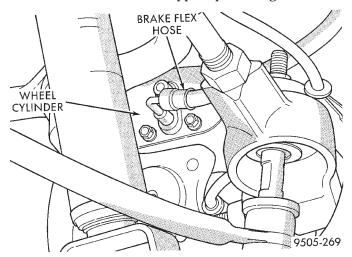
Brake Flex Hose Tube At Wheel Cylinder
